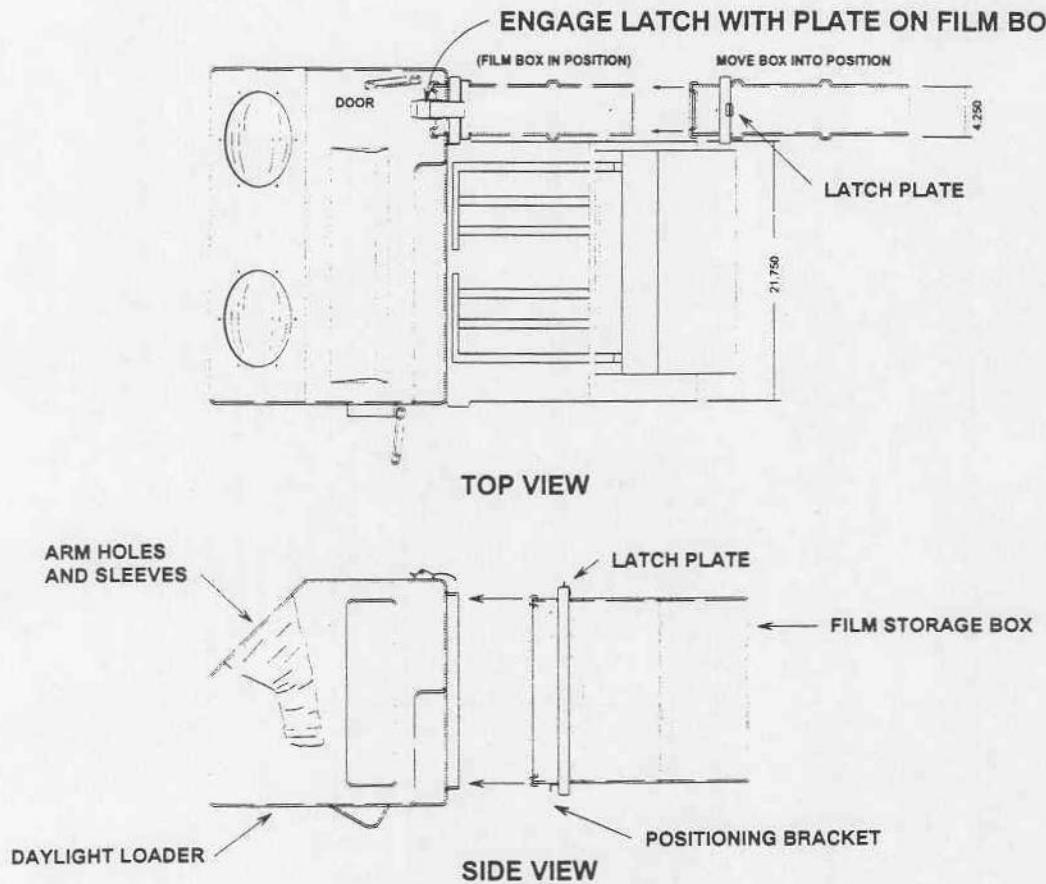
, Mounting Film Storage Box to Daylight Loader
